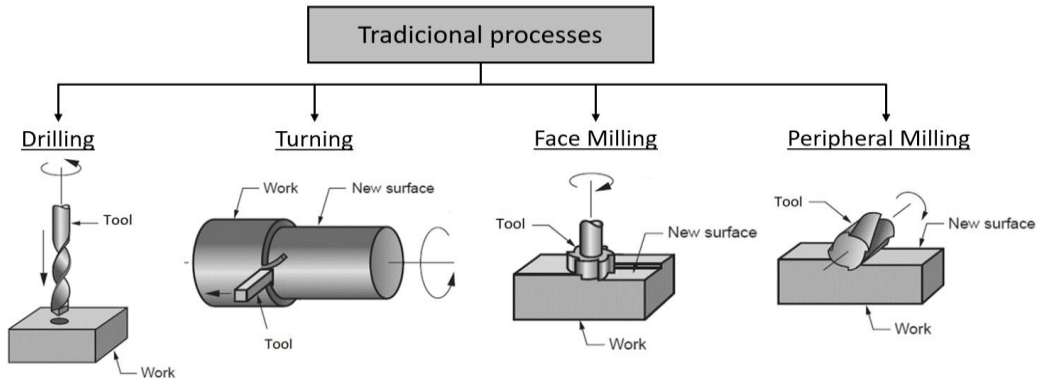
Most common conventional machining processes: drilling, turning, face milling, peripheral milling, adapted from [5].
